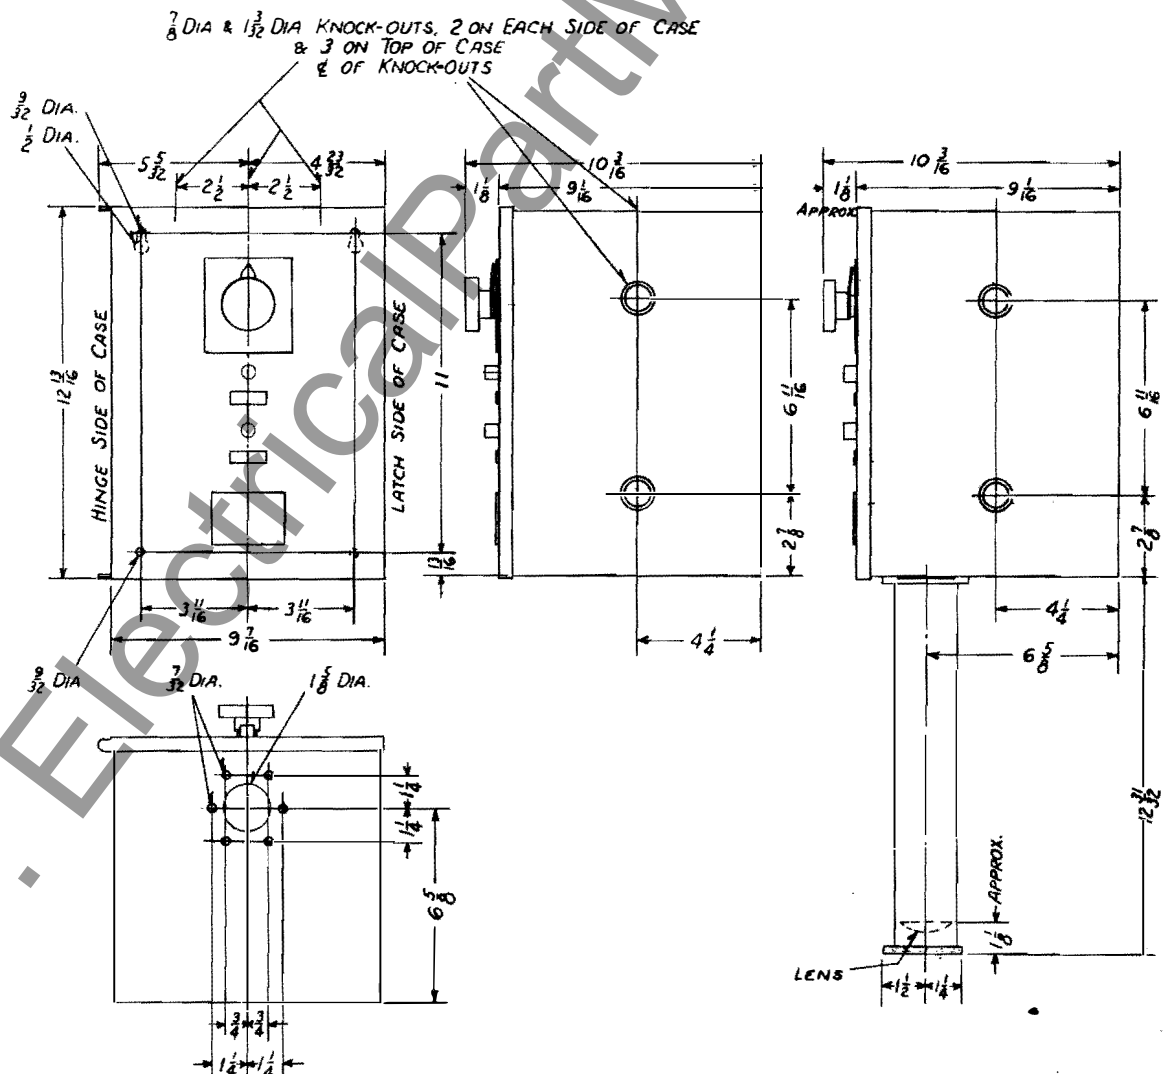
Outline Drawing for Photo-Troller without Focusing Tube and with long Focusing Tube
